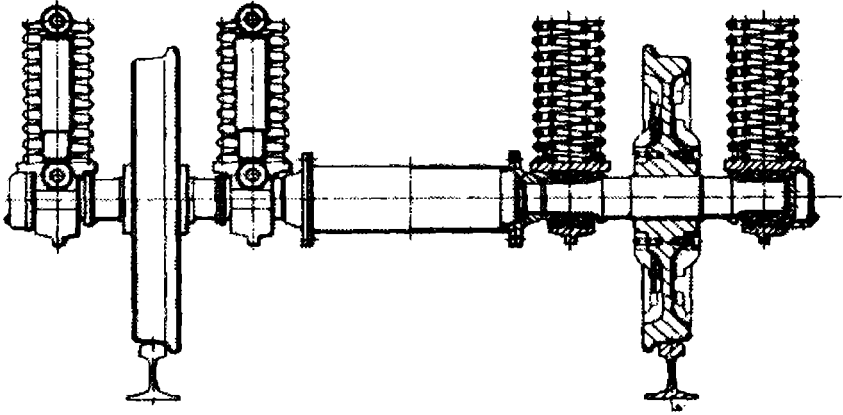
The high-speed bogie suspension system resting immediately on the wheelset axis
